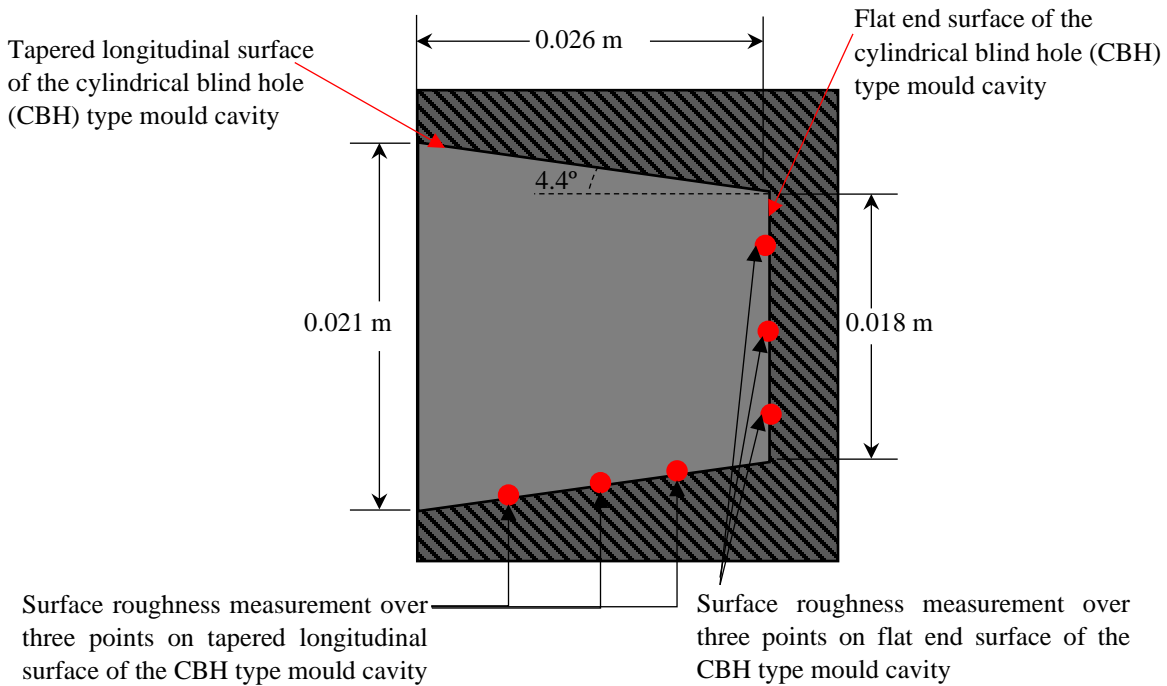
Dimensions of the cylindrical blind hole (CBH) type mould cavity for finishing with the magnetorheological grinding (MRG) process and surface roughness measurement on their surfaces.
